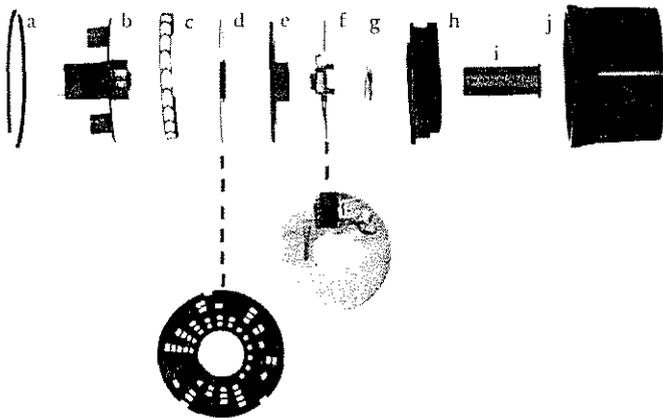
Elements of the optoelectronic switch-in-a-knob that generates a 5-bit code for control of time/div and frequency span. (a) retainer ring, (b) phototransistor holder assembly, (c) spacer ring, (d) shutter, (e) light baffle, (f) LED array holder assembly, (g) spring washer, (h) detent assembly, (i) shaft assembly, (j) knob shell.
